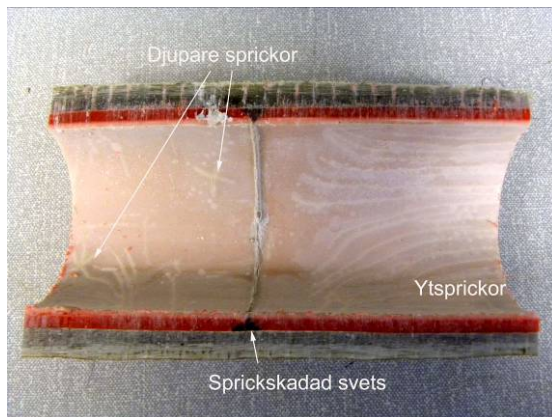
PVC-lined FRP with crack formation. Crack 1 1 – 2 mm deep, cracks 2 and 3 ca 4 mm deep.
